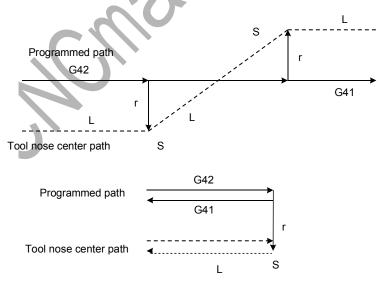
Linear-linear, no intersection (changing compensation direction)
